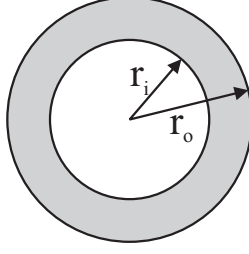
Rubbing surface area of the stainless steel workpiece.
